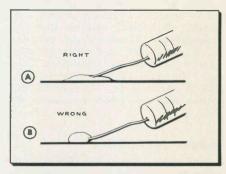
(A)—A properly made chassis joint has a cohesive contour. (B) "Blob" type will not be electro-mechanically secure.
